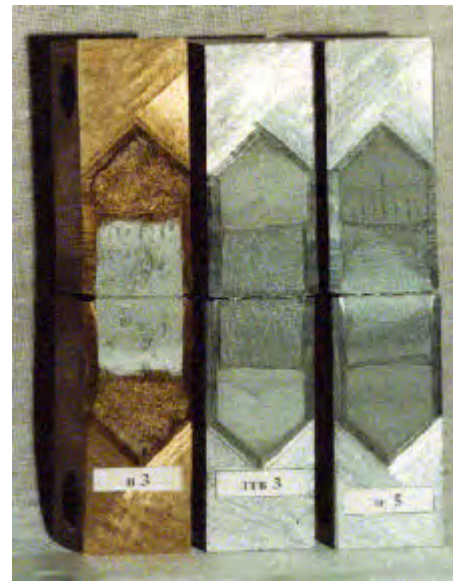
Fracture surfaces of three CT-1T specimens from a 10GN2MFA steel (Dn-350) experimental pipe with EA-400/10 welds: left specimen, crack in BM, middle, crack in WM, right, crack in HAZ [9]
